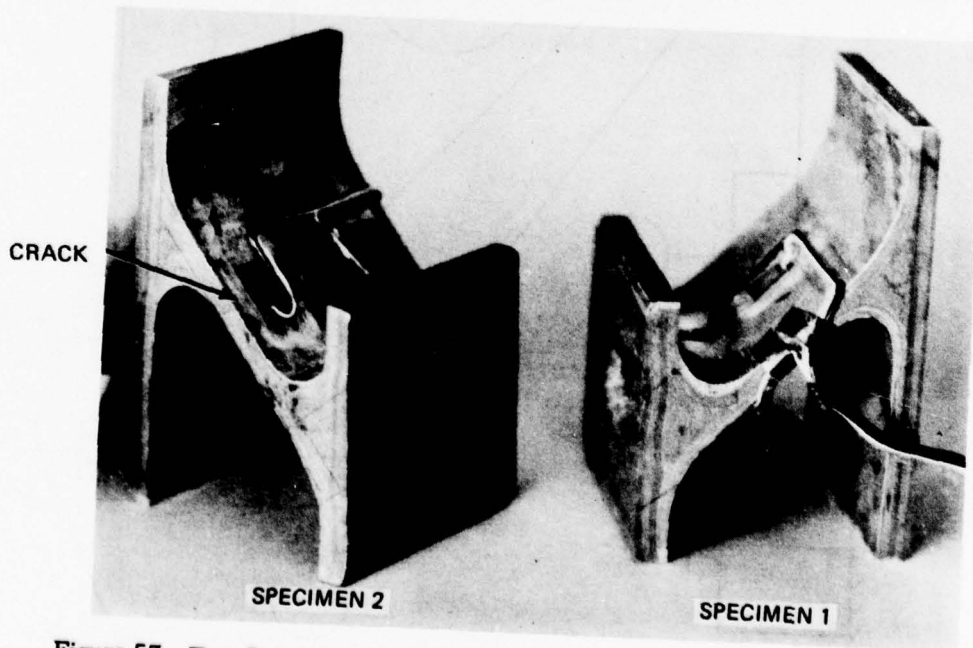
Test Specimens SK27377 After Test. Crack Is Visible on Left Specimen.
